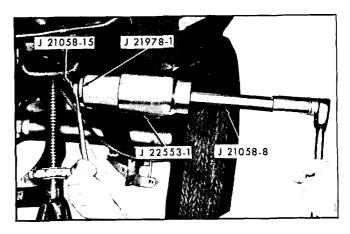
Removing Leaf Spring Front Bushing (F Series Shown)
